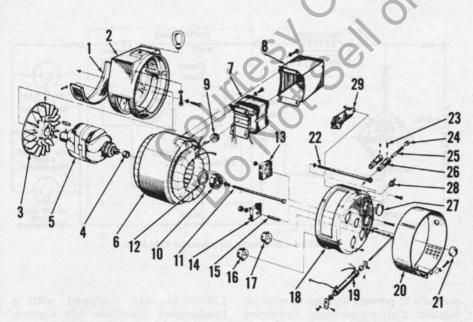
Exploded view of typical generator covered in this section. Switch (28) and control board assembly (29) are used on Loadamatic® Automatic Idle Control† models only.
